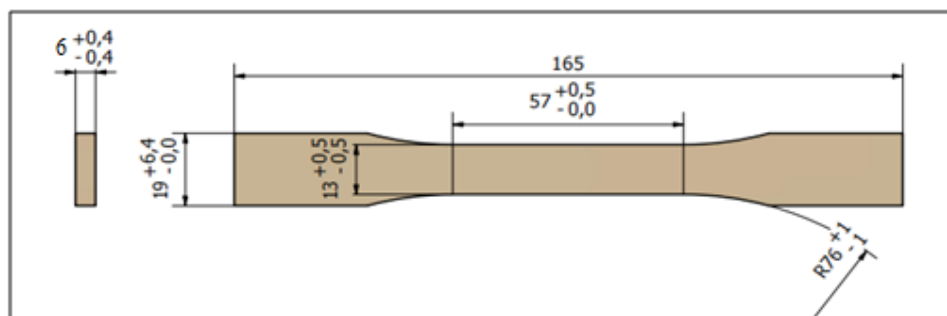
Shape and dimensions of 3D printed specimens used for hardness test.
